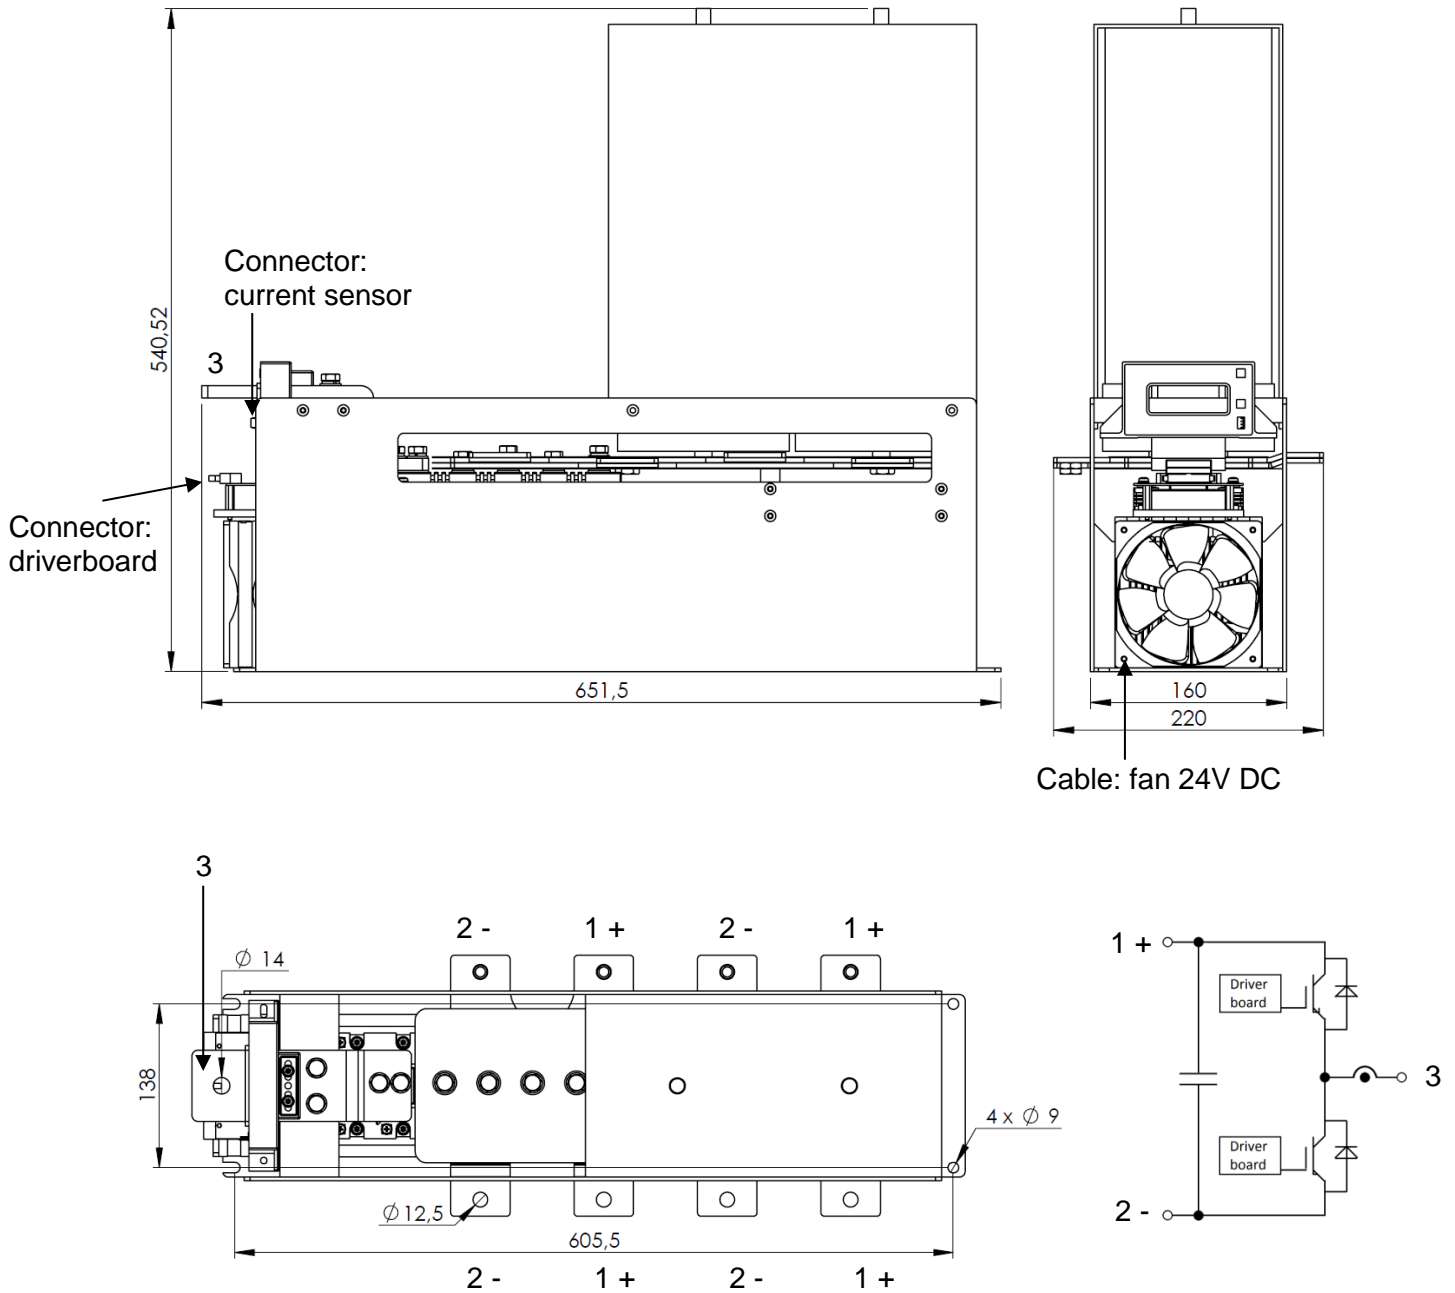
Mechanical drawing of the VARIS™-10-17-A (air cooled)
